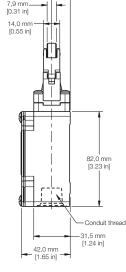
GSC/GSD Side Rotary (Head Code A5) Dimensions
